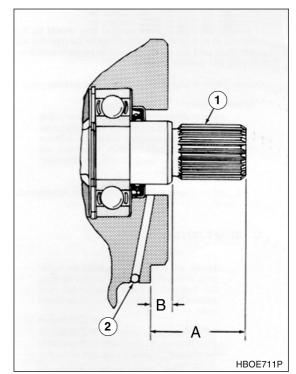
SINGLE SHAFT SEAL ARRANGEMENT
